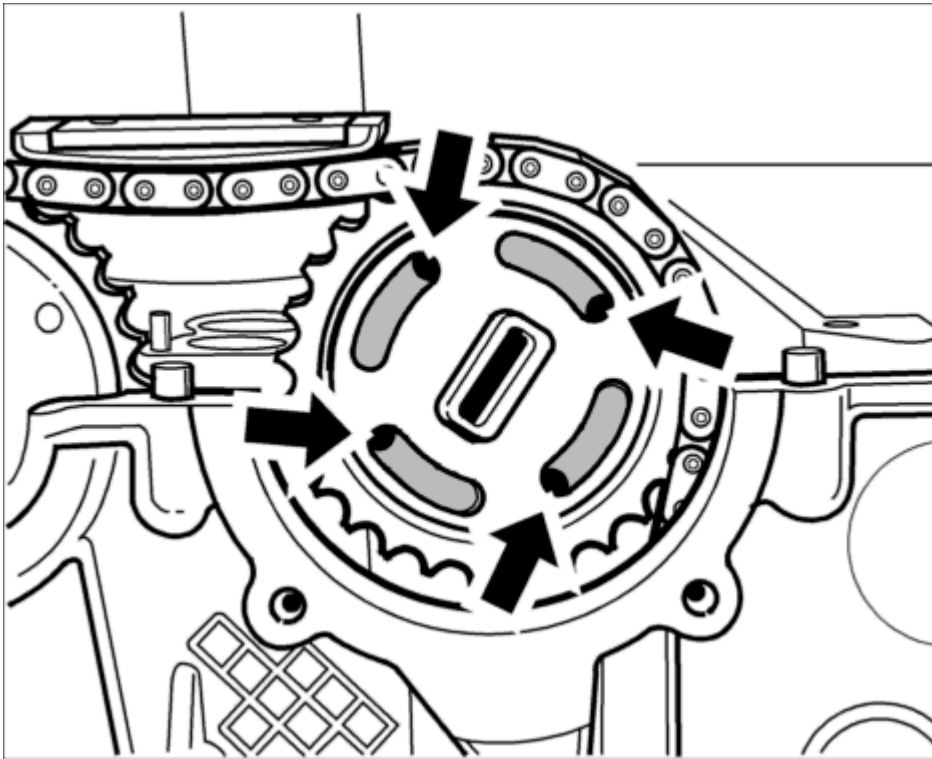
Position of sprocket 4 - 6 at 60° before TDC
